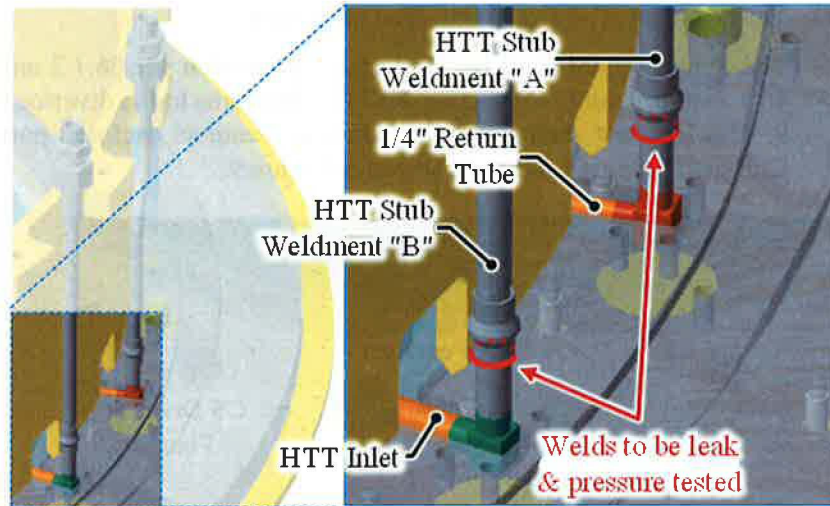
Welds to be tested during the installation of the HTT Inlet and Outlet Stubs
